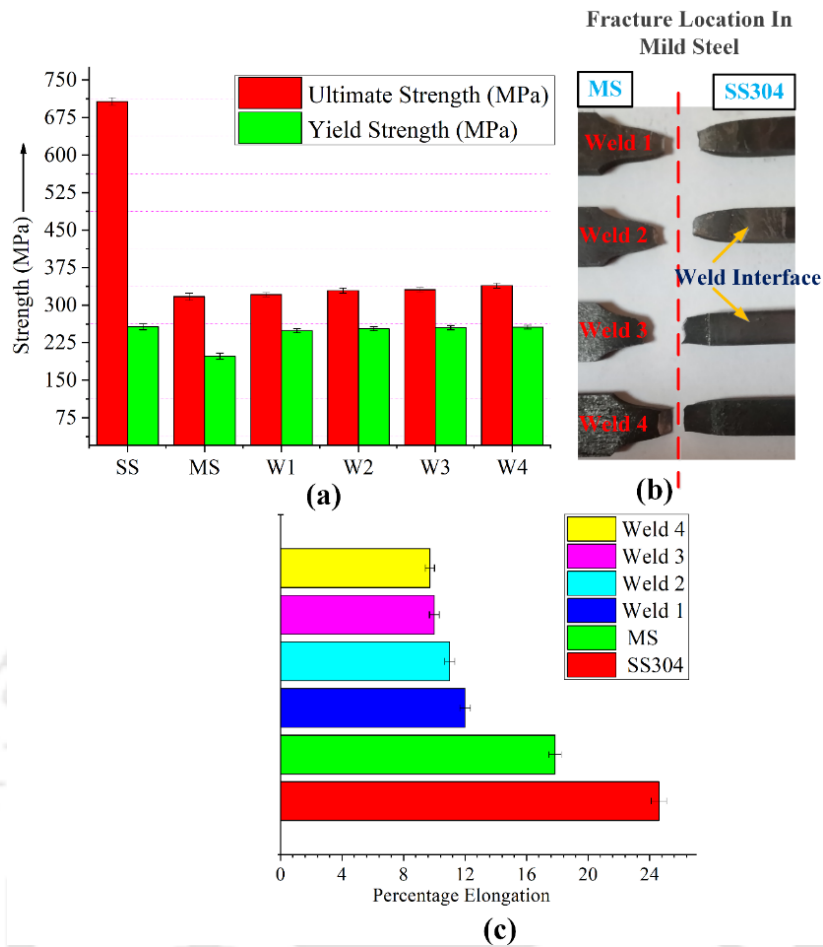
Tensile test results: (a) tensile strength and yield strength of welded specimens and base materials, (b) tensile specimens showing fracture location in the UNS G10080 steel base material, and (c) comparison of % elongation of weld joints with the base material
